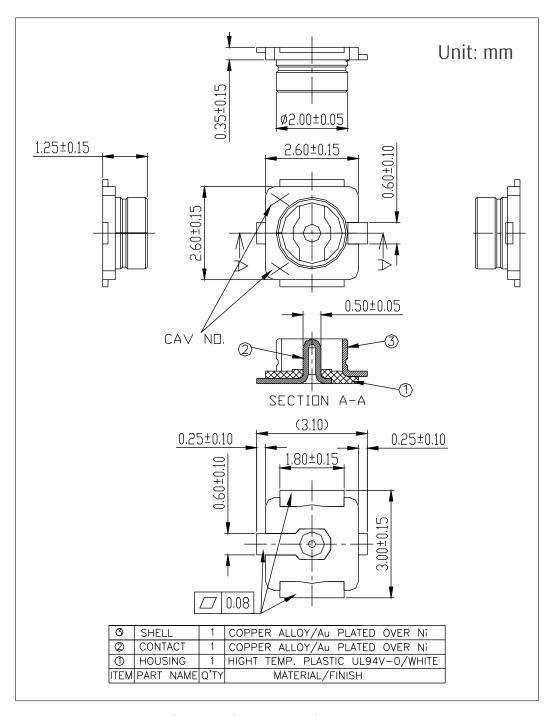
ESP32-WROVER-I U.FL Connector Dimensions
